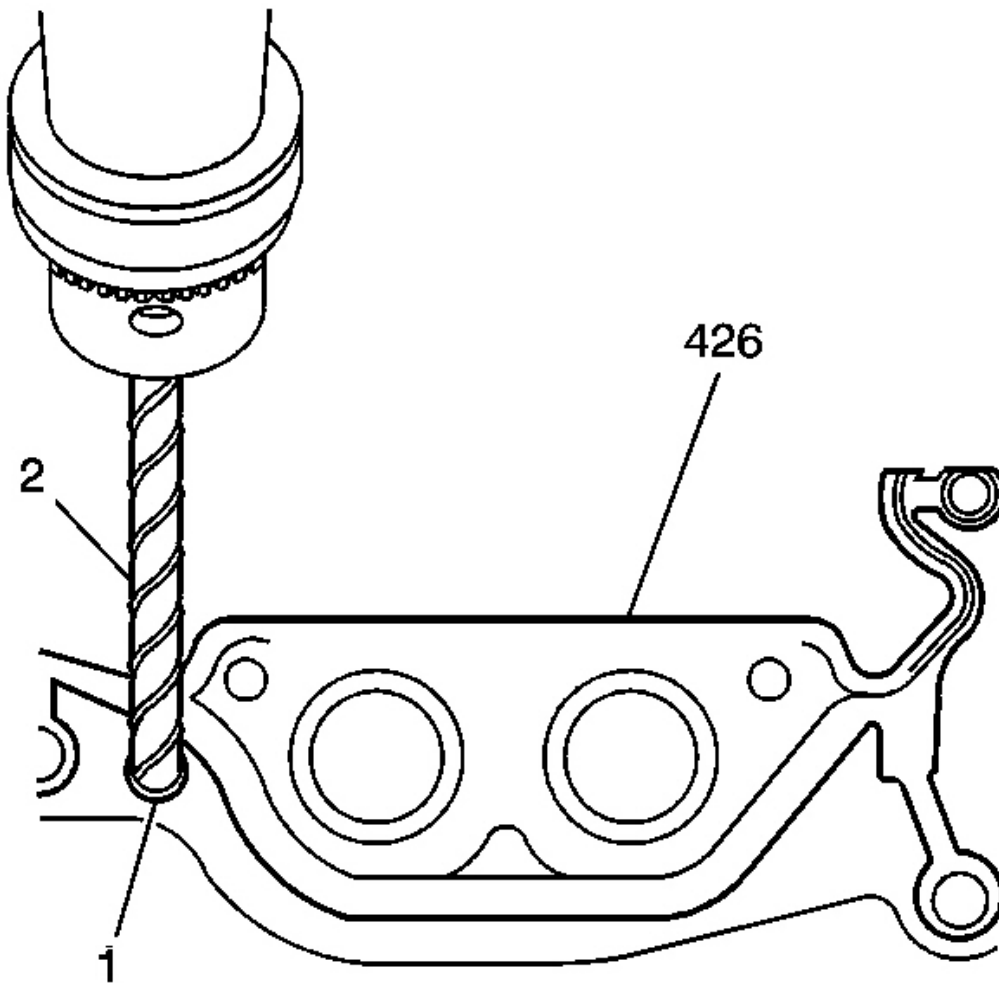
View Of Oil Pan Gasket Retaining Rivets & Drill
